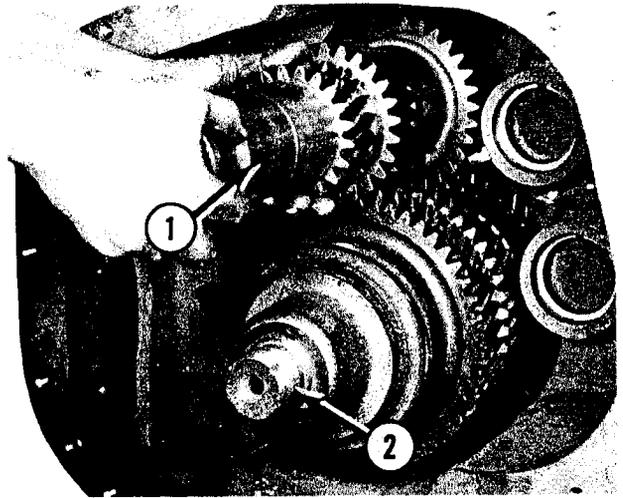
REMOVE UPPER SHAFT ASSEMBLY
